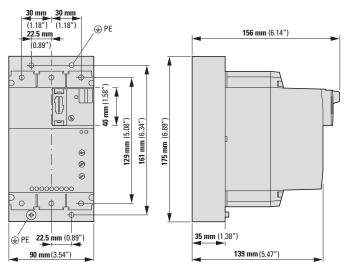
Dimension drawing DS7 with SWD – Size 3 (41 – 100 A)
